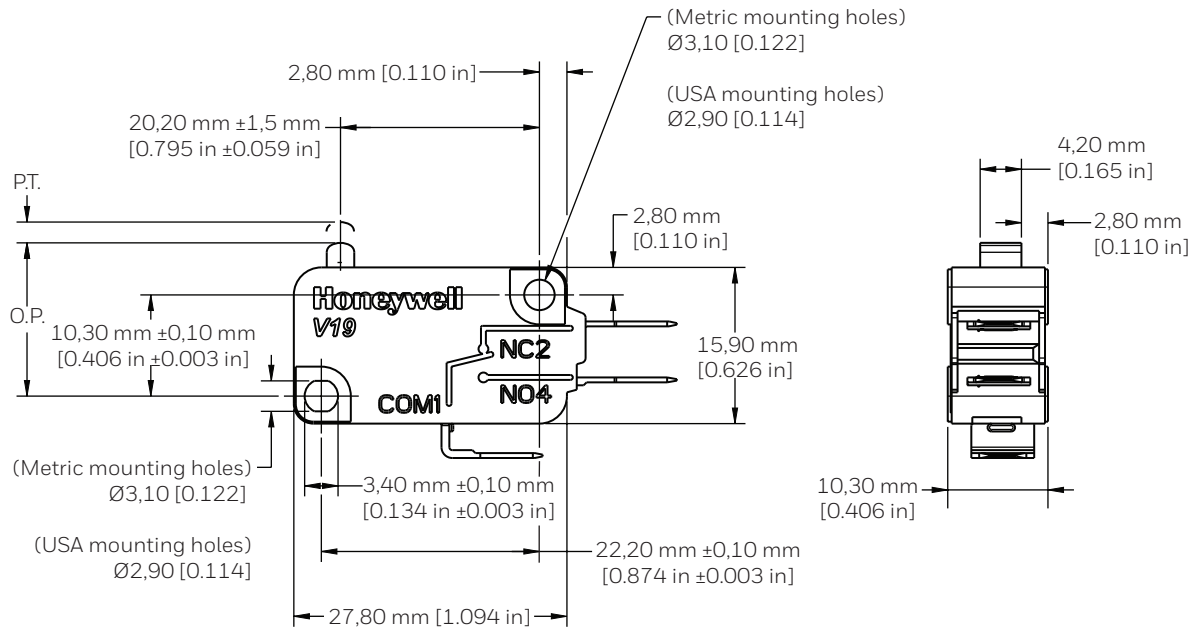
V19 SERIES HOUSING DIMENSIONS
